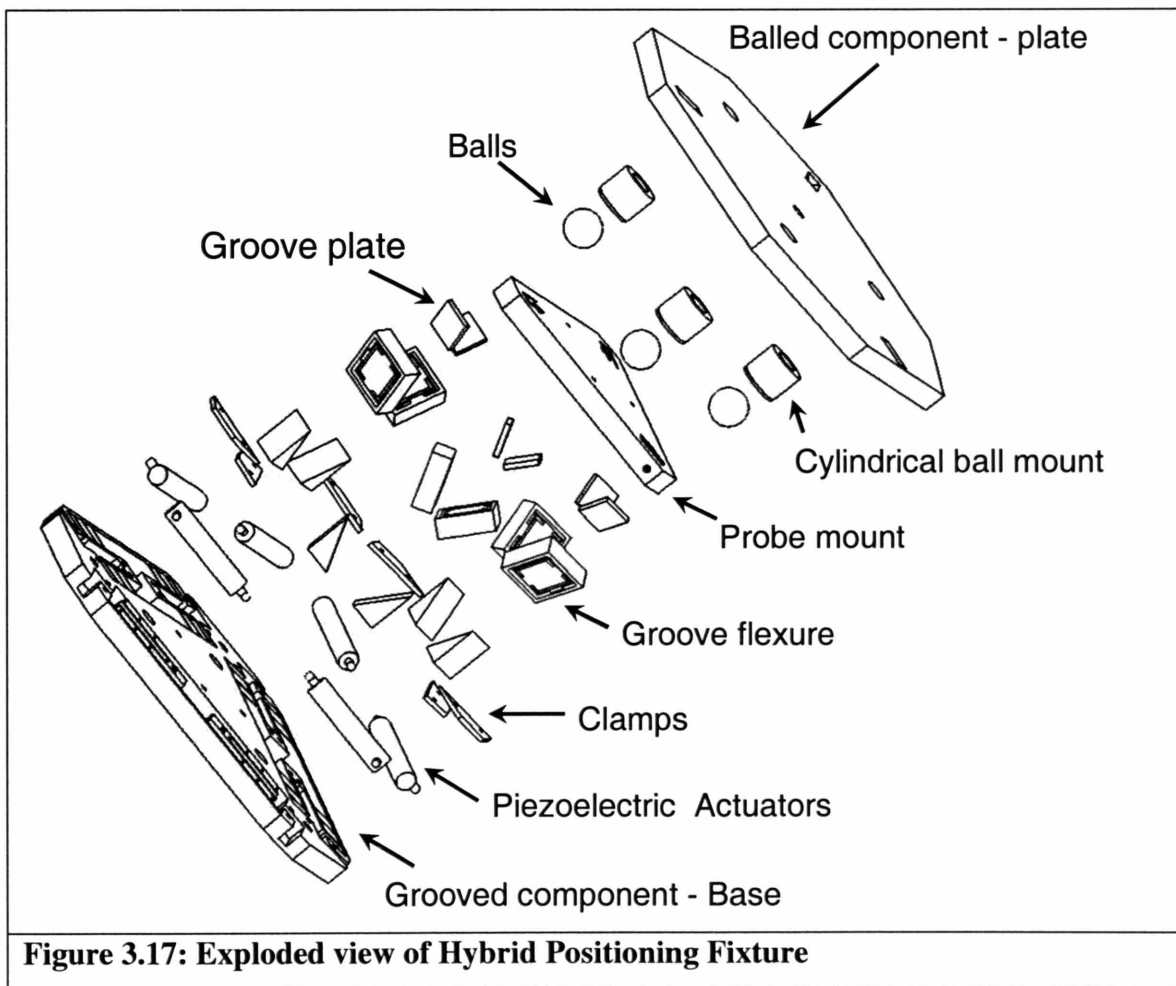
shows an exploded view of the Hybrid Positioning Fixture.
